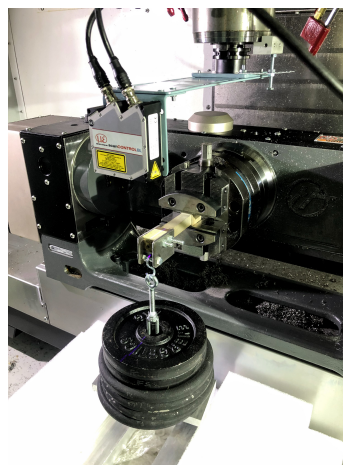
Specimens deformed shape measurement – 2D laser scanner
